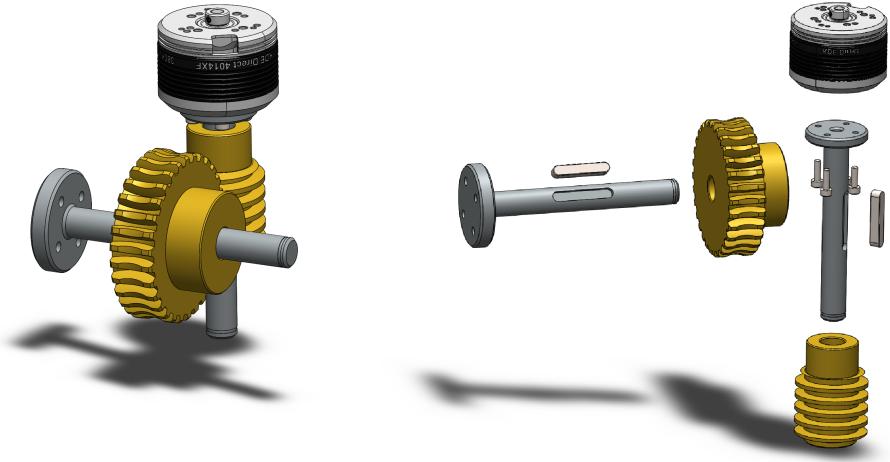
The Elbow joint in its assembled and exploded state. This sub-assembly consists of a brushless dc motor, an axle made of steel connecting the motor to the gearbox consisting of a worm gear assembly and the leftmost axle connecting the joint to the forearm sub-assembly.
